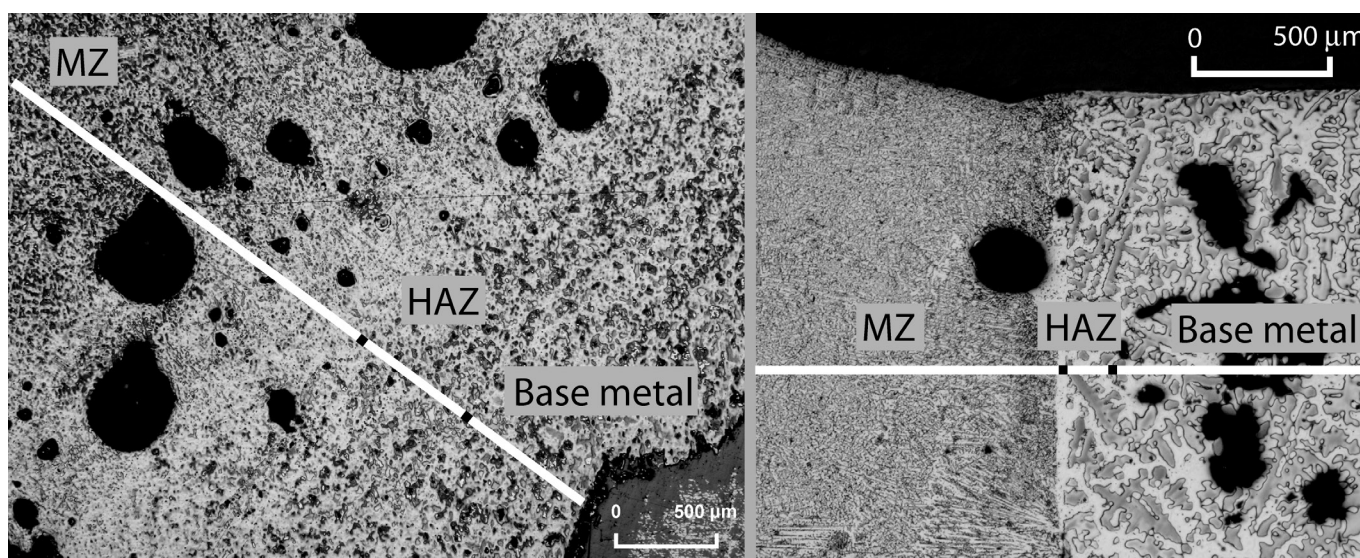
Cross section of welds after etching. Left: antique weld from a horse from Neuvy-en-Sullias, the bronze has 10wt% tin and 7wt% lead. Right: experimental weld, the bronze has 10wt% tin. In both images base metal is the primary casting, MZ the melted zone and HAZ the heat affected zone.
